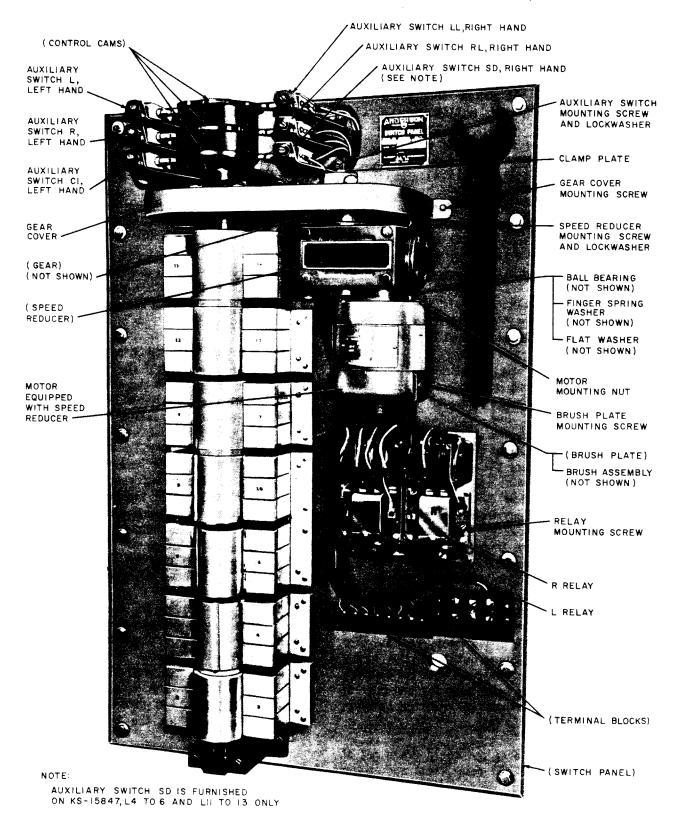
KS-15847 Type Switch (Manufacture Discontinued) with Wrench for Manual Emergency Operation
